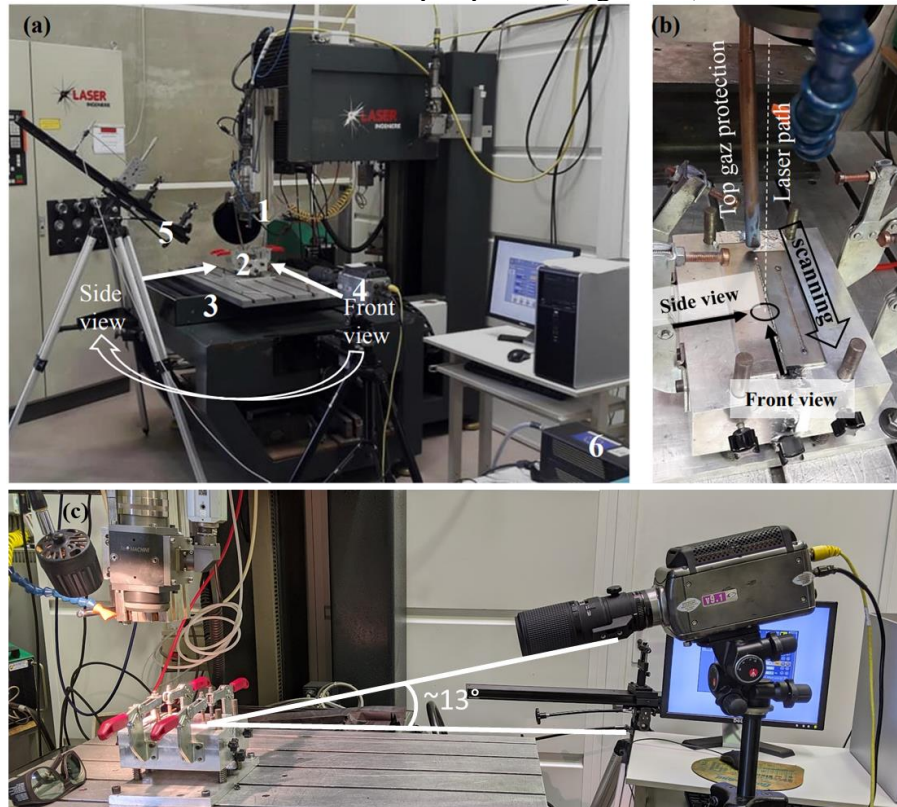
(a) Experimental setup: (1) welding heat, (2) sample, (3) welding table, (4) HSI camera, (5) spectra acquisition lens setup, (6) spectrometer CCD and (b) Sample position.
